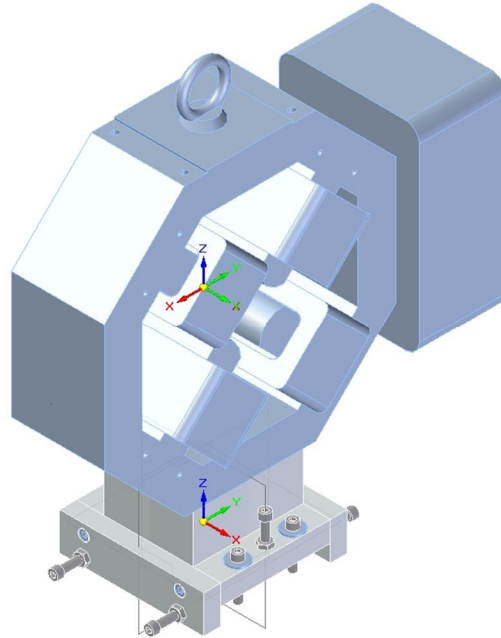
CAD Drawing of 2.362Q3.5 Quadrupole Magnet
